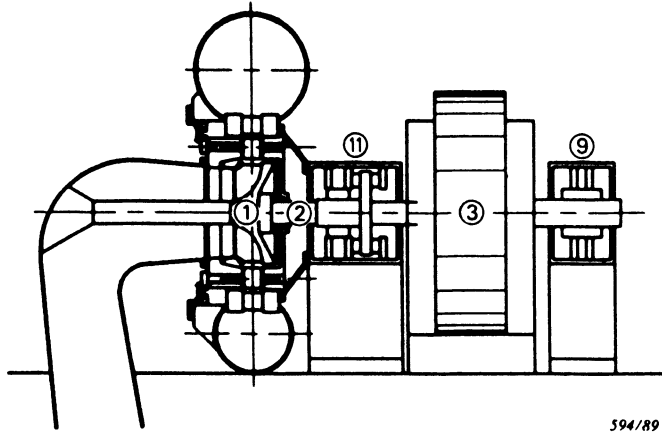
Example of a horizontal machine (Francis turbine) with two bearings
